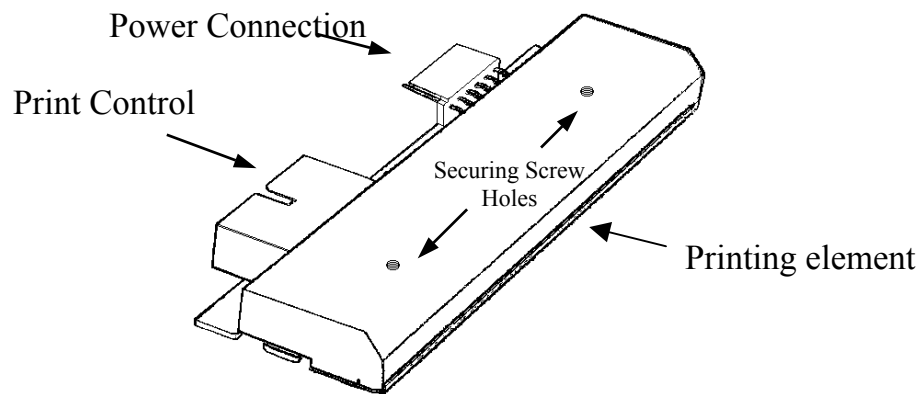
The printhead's printing element is fragile, avoid touching the printing element
